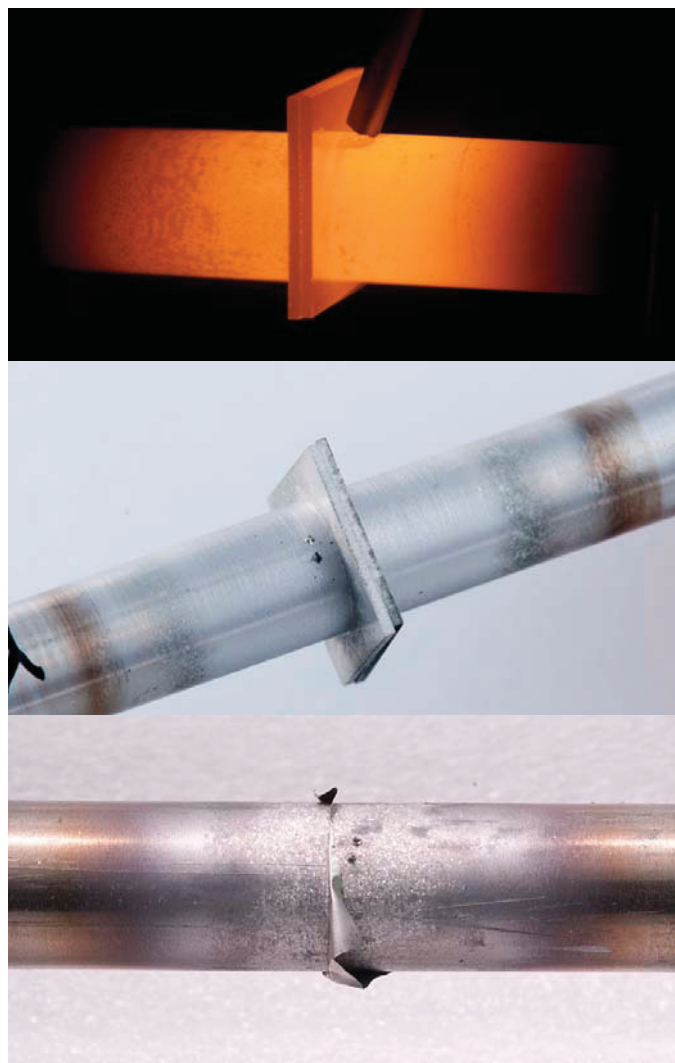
(a) Alloy N base metal with Alloy N inserted sheets, diffusion weld in progress in the Gleeble; (b) same weld completed; (c) Alloy 800H weld with Ni foil interlayer.
